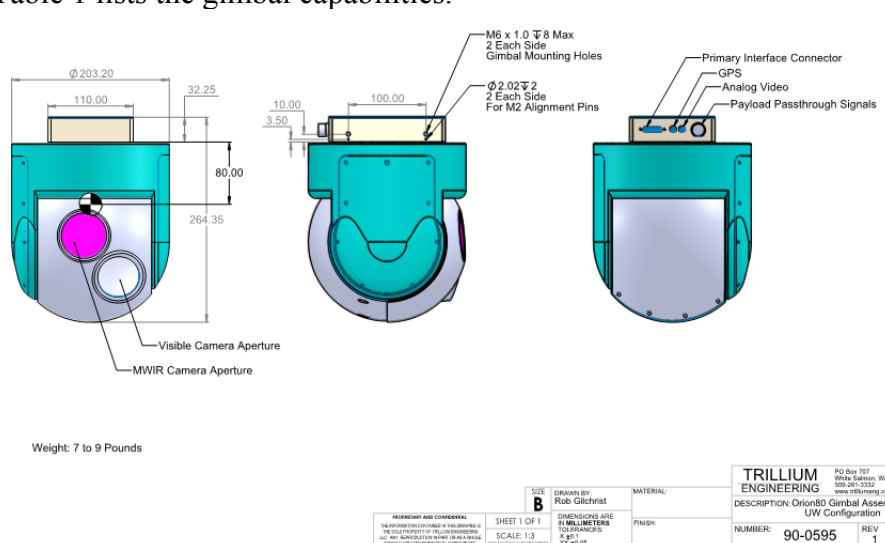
Technical gimbal drawings (by Trillium Engineering) showing the main components, camera ports and windows, connectors and overall dimensions (in mm).
